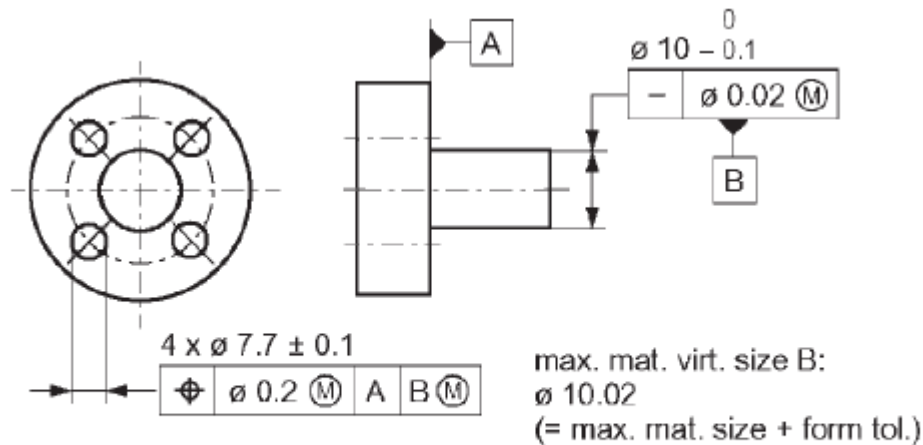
Maximum material virtual size of datum B; form tolerance (straightness) to be regarded
